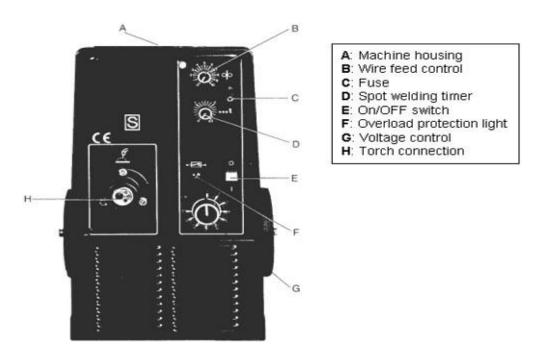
21 - "all-in-one" machine with a built in wire feeder. [15]
